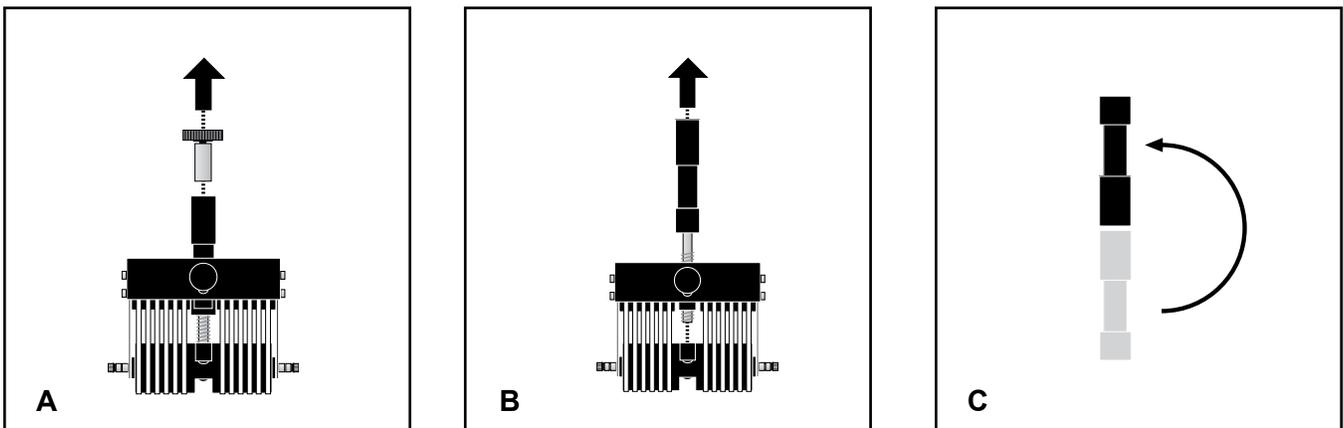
Adjusting Gate Assembly for Low-Tension
